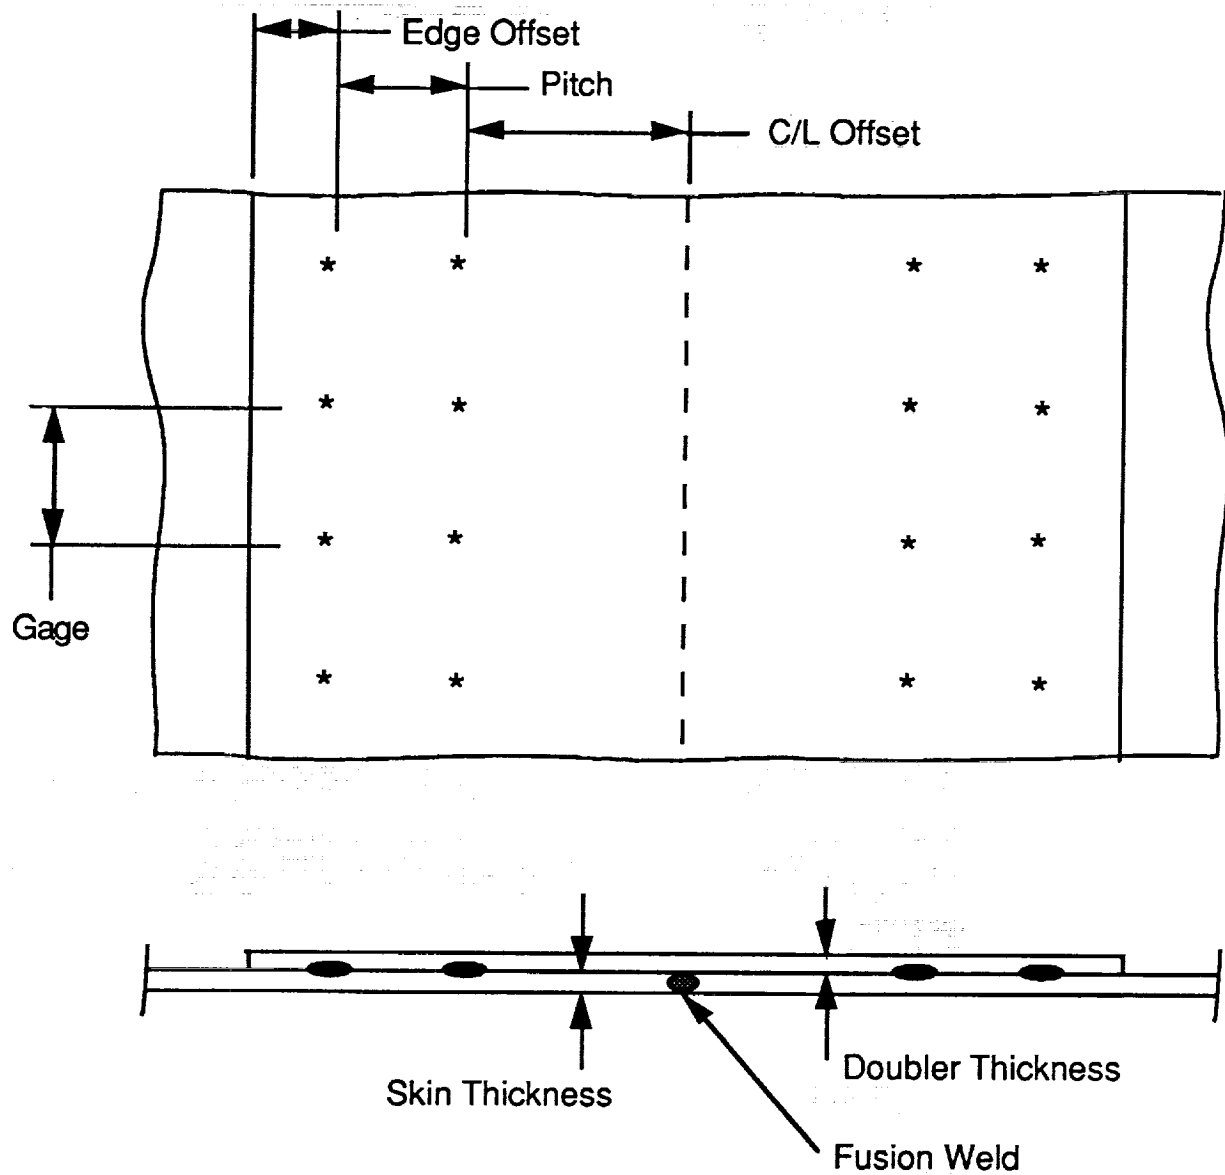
Longitudinal Joint Configuration and Nomenclature for the Even Row Spot Weld Pattern.
